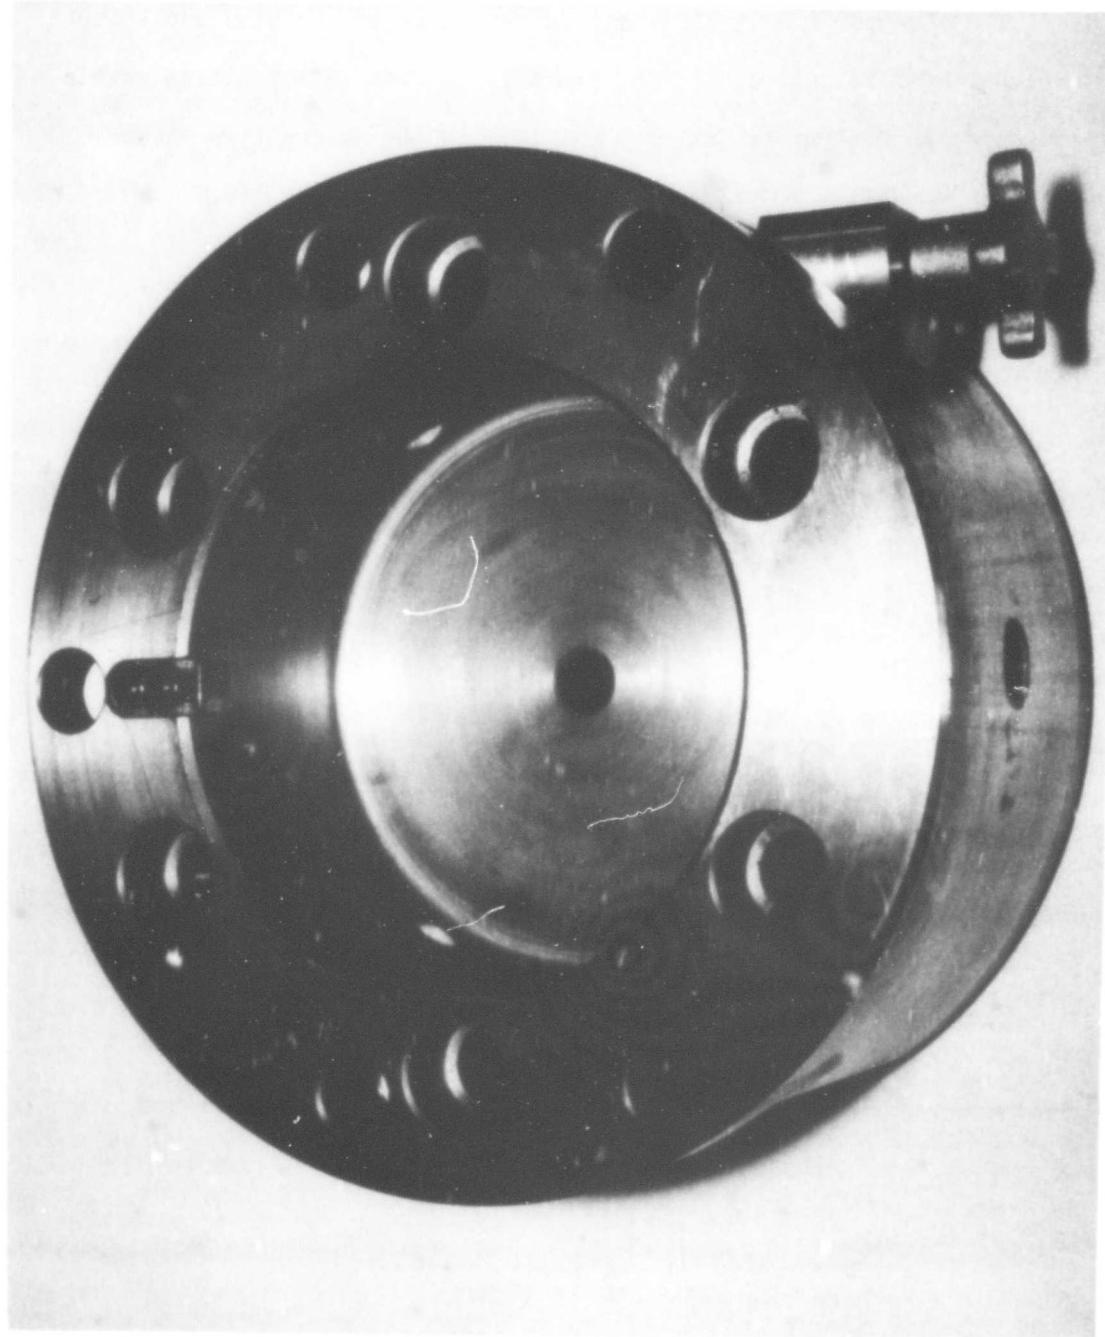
BASIC HOLDER LESS STRIPPER RING
